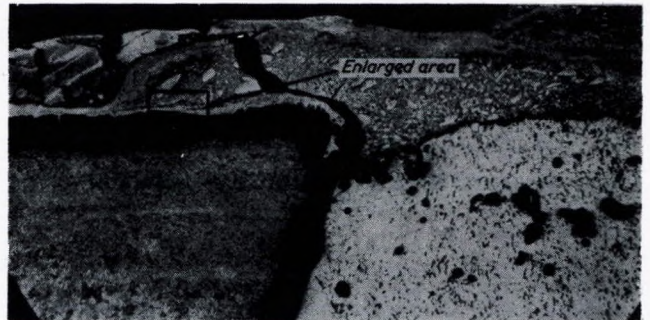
Melted debris overlaying pinion thrust pad and steel backing ring
